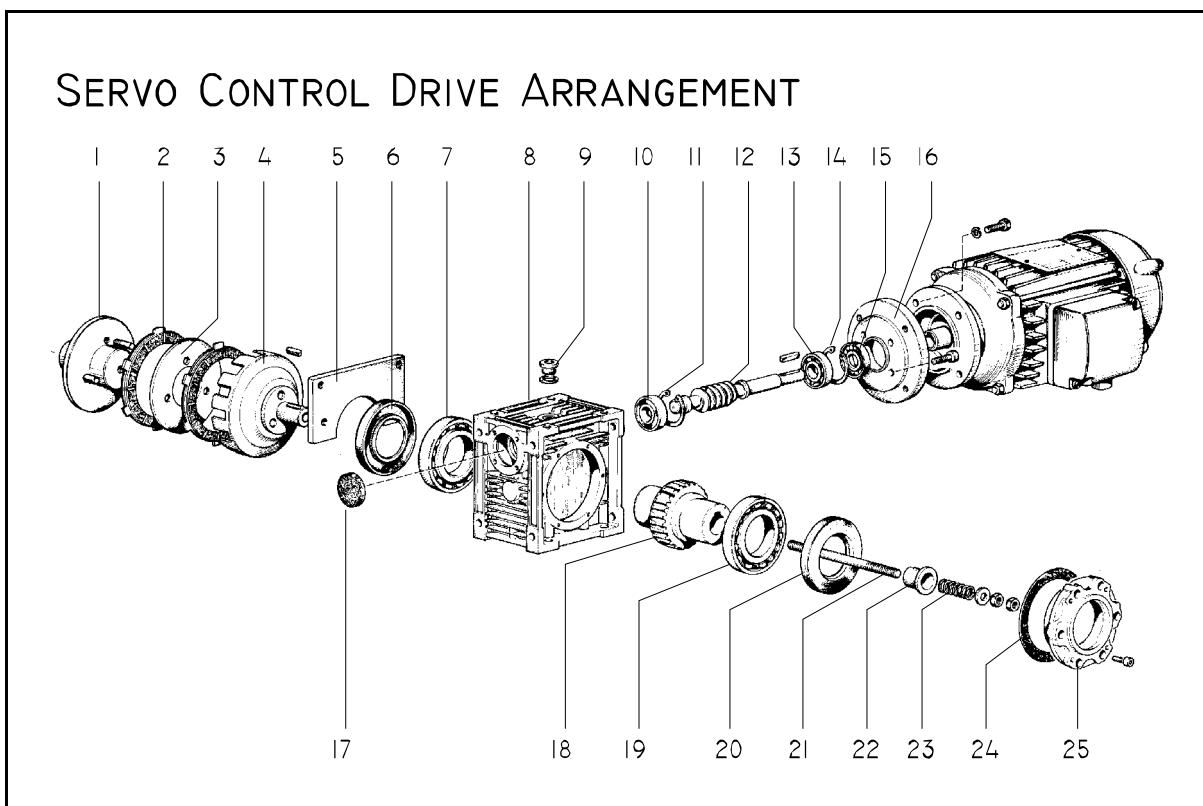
Discharge Variator Servo Motor (Exploded View)
